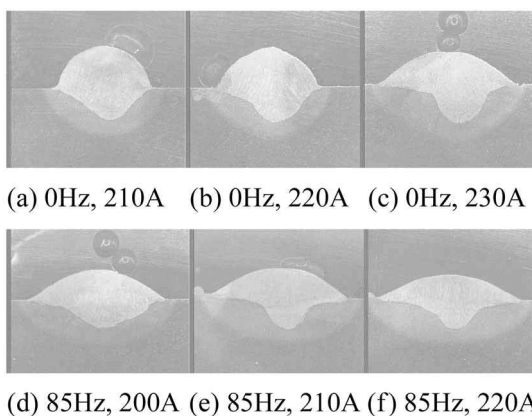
Cross-sectional profiles of the weld beads produced at a wire-feeding rate of 100 mm/s under different welding currents and different wire oscillation frequencies
